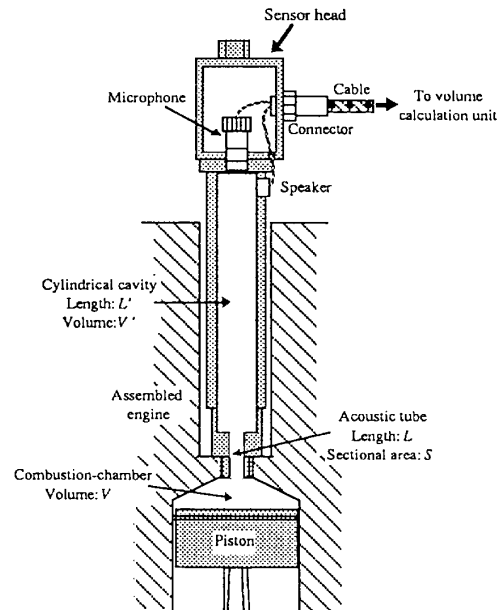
Schematic diagram of sensor head for use with assembled engines
